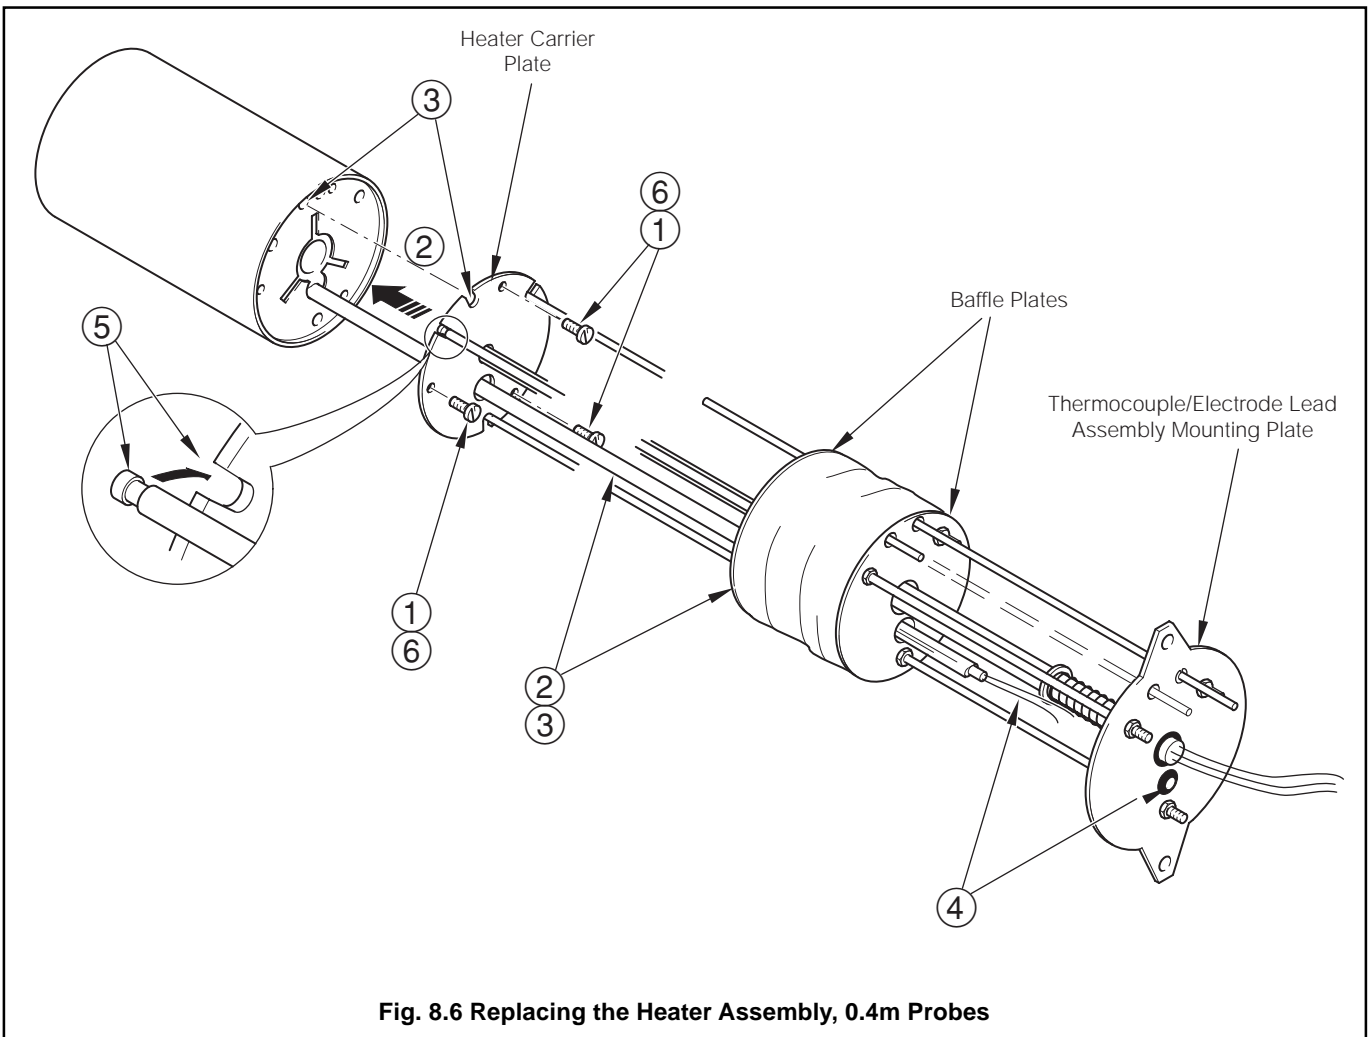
Replacing the Heater Assembly, 0.4m Probes
